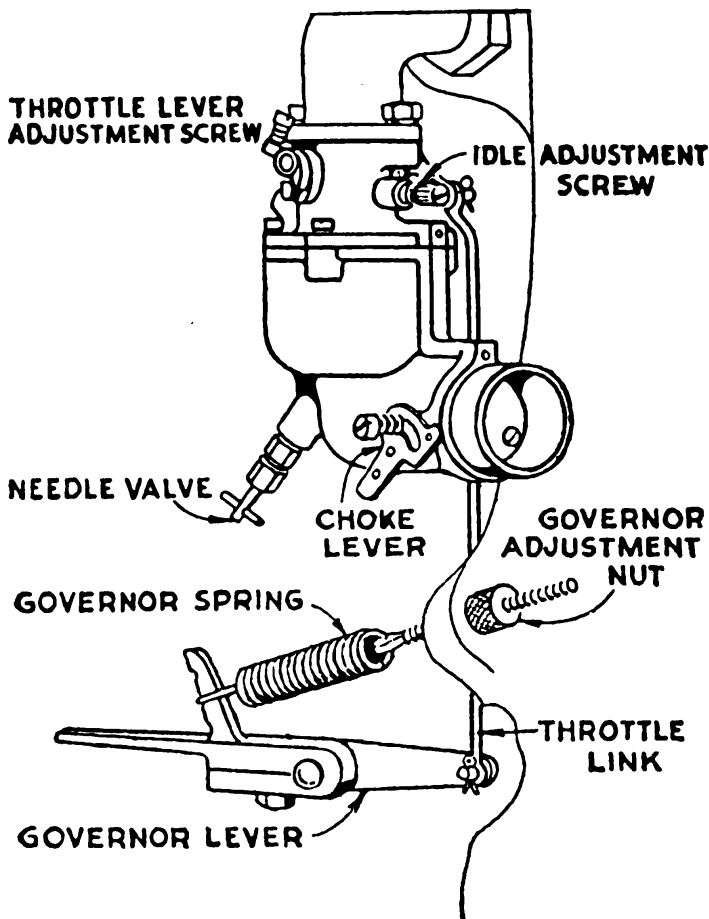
CARBURETOR AND GOVERNOR HOOK-UP
